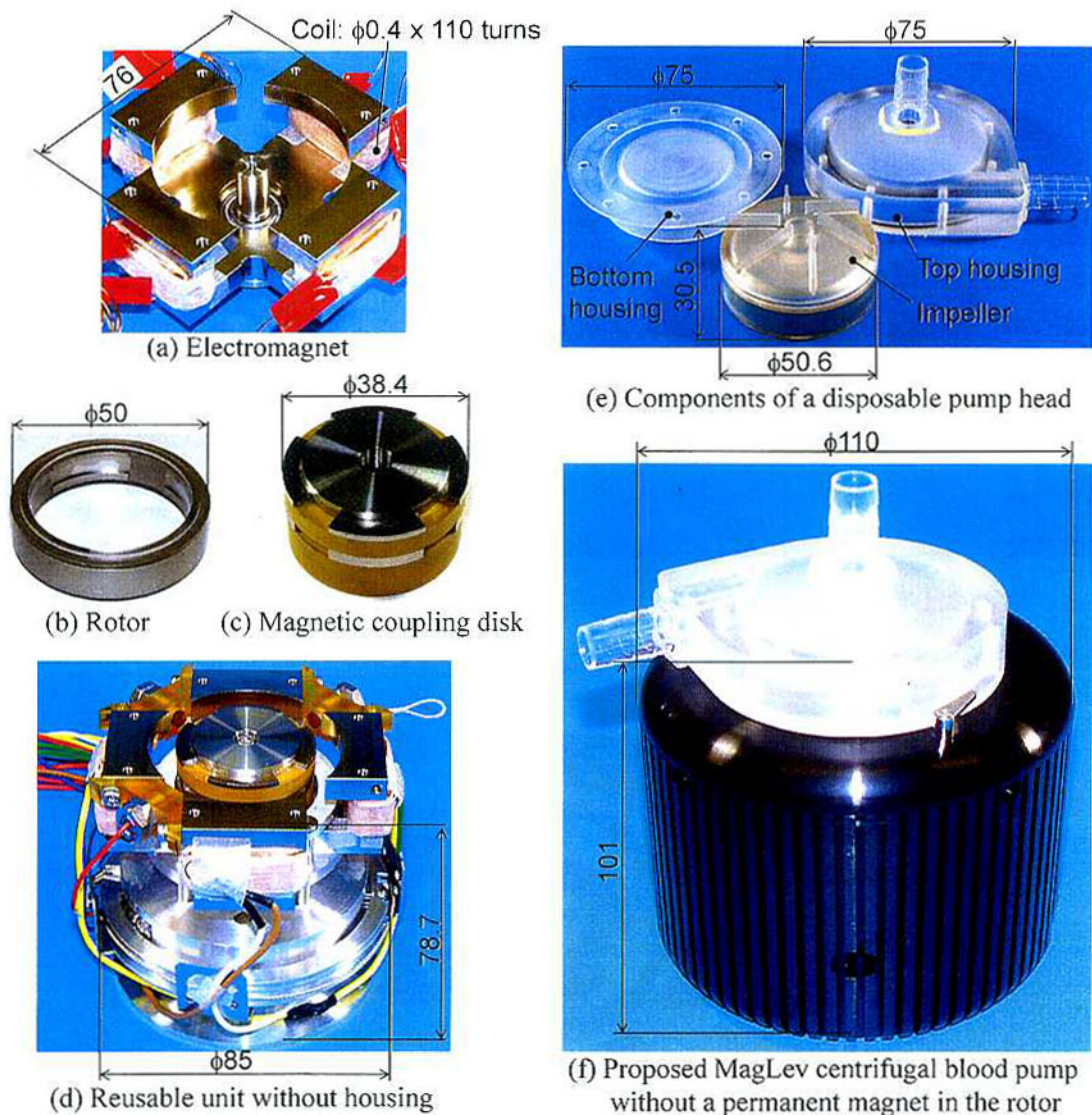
Photographs of the parts and an assembled prototype pump
